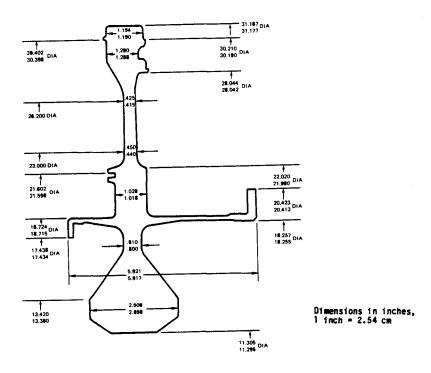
Principal Dimensions of JT9D First Turbine Disk P/N 812901
